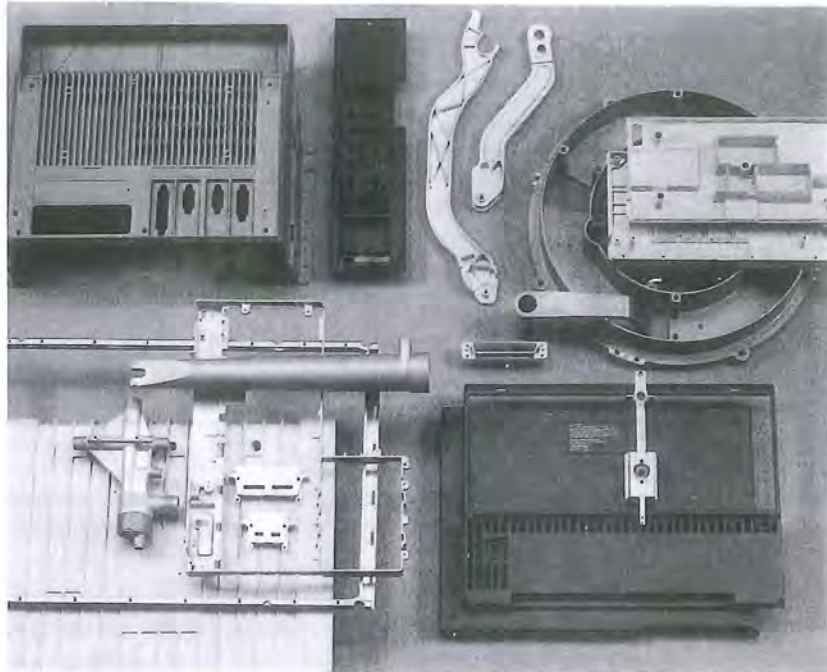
Assorted aluminum, magnesium, and zinc die castings. Courtesy of Chicago White Metal Casting, Inc.
